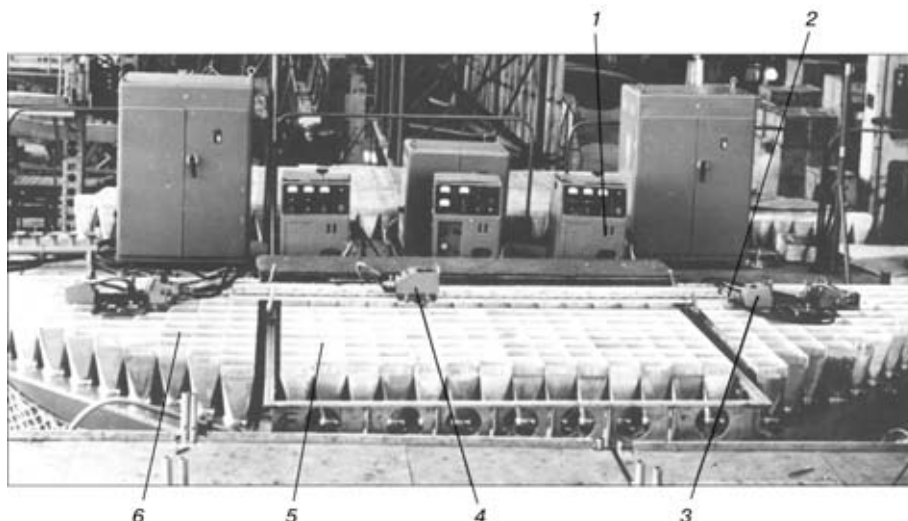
Welded sections of honeycomb metal structures: 1 — A-1281 power source; 2 — OB-213 plasmatron; 3 — A-1284B automatic machine; 4 — A-1284 automatic machine; 5 — inner section; 6 — peripheral section
